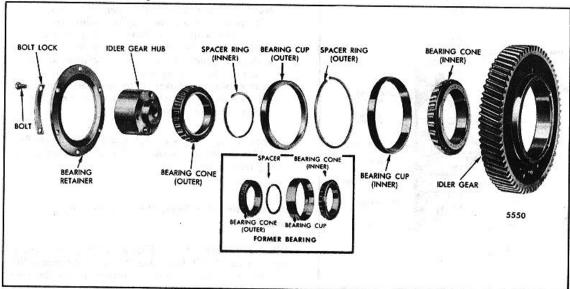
Idler Gear Details and Relative Locating Parts (Current Bearing)
